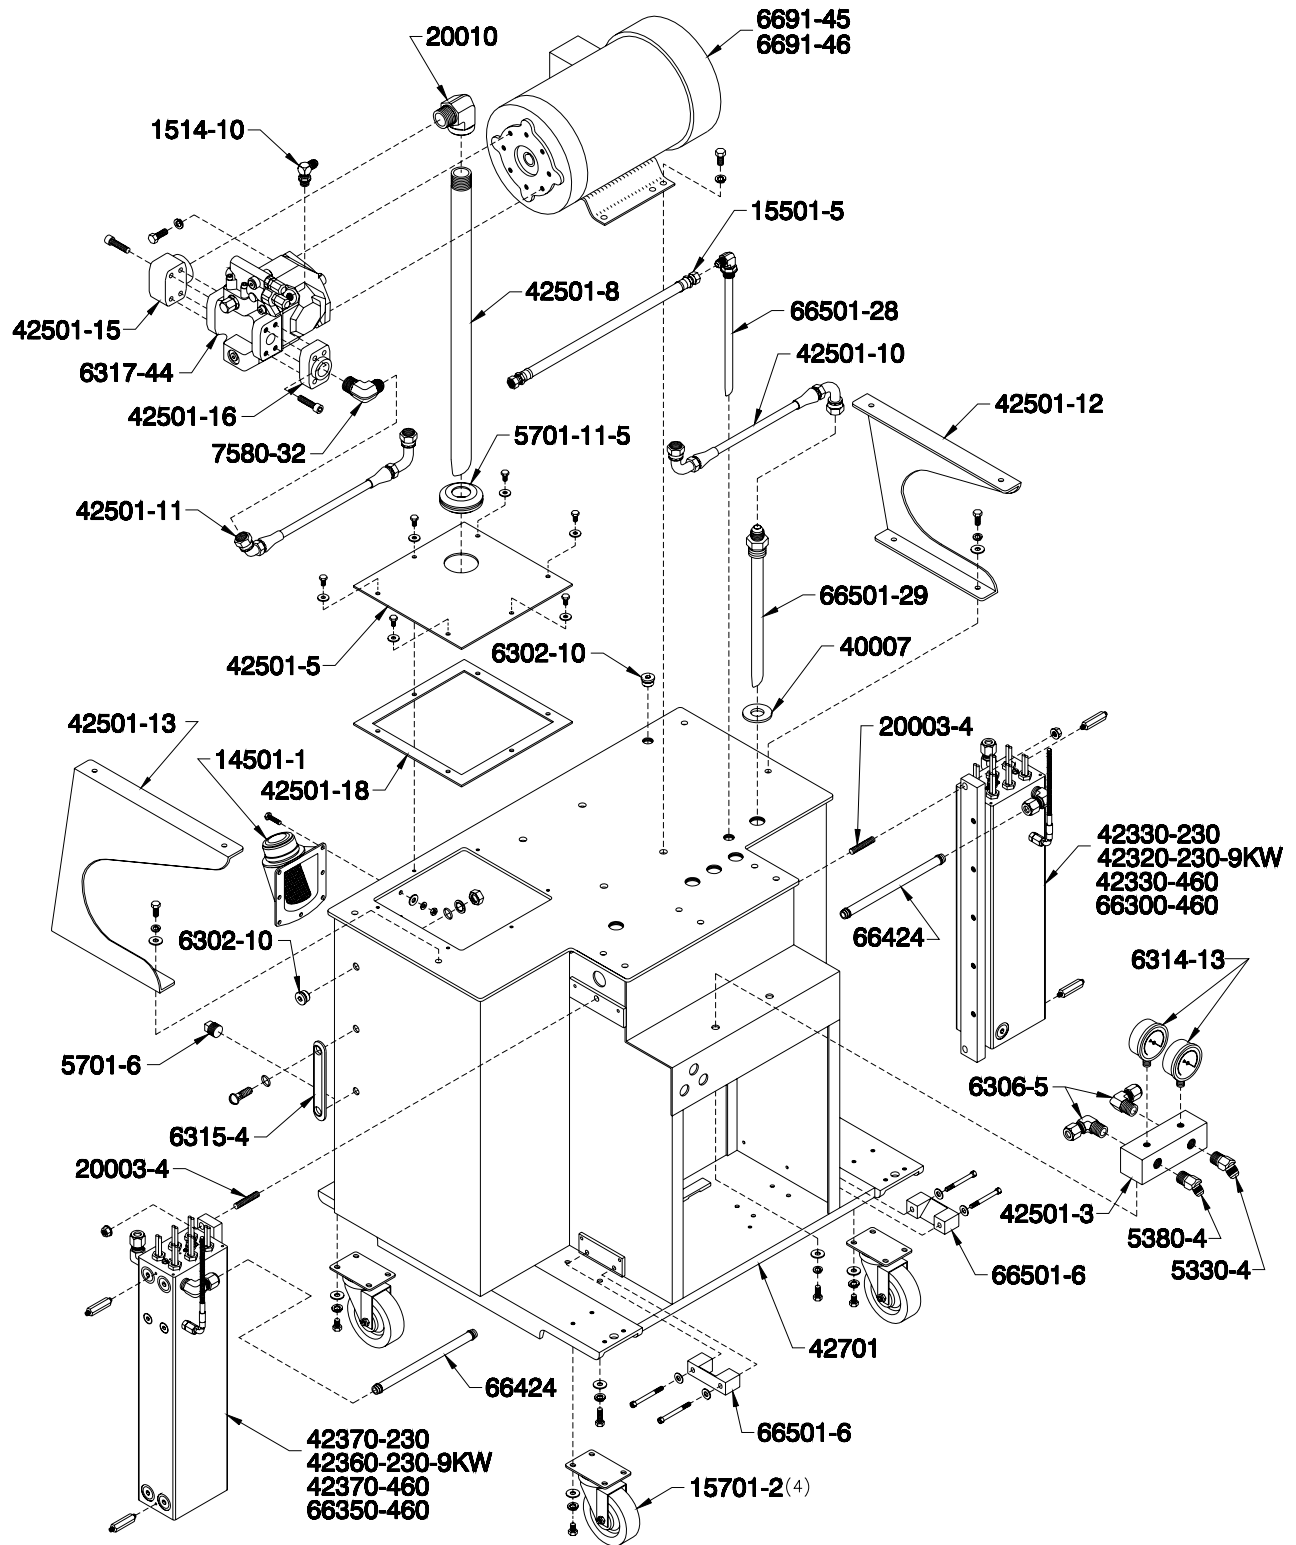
Base Assembly (Part No. 66501-SIZE-SIZE), Exploded View
